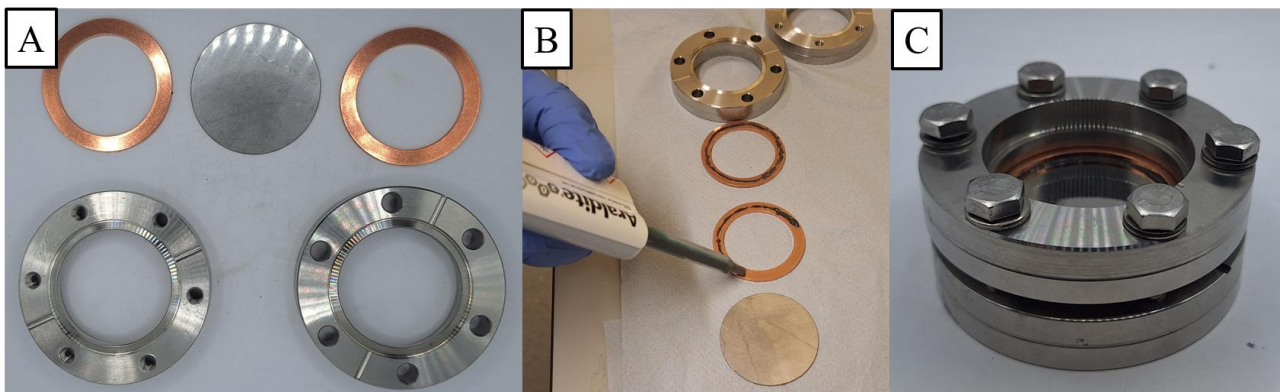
(a) Flanges, copper gaskets, and specimen; (b) specimen assembly; (c) specimen placed in the oven.
